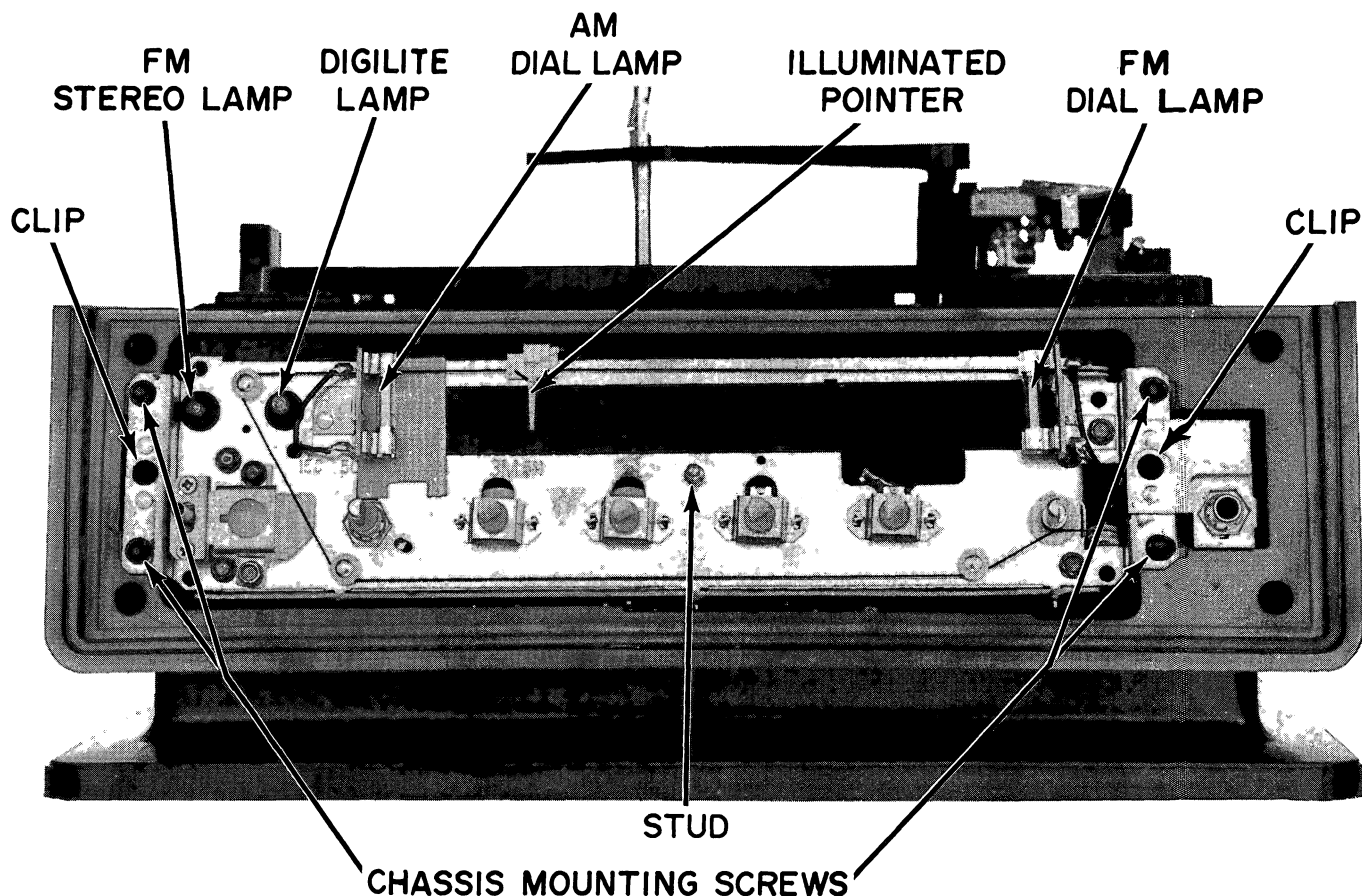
OUT FRONT CHASSIS REMOVAL — GROUP "B"
